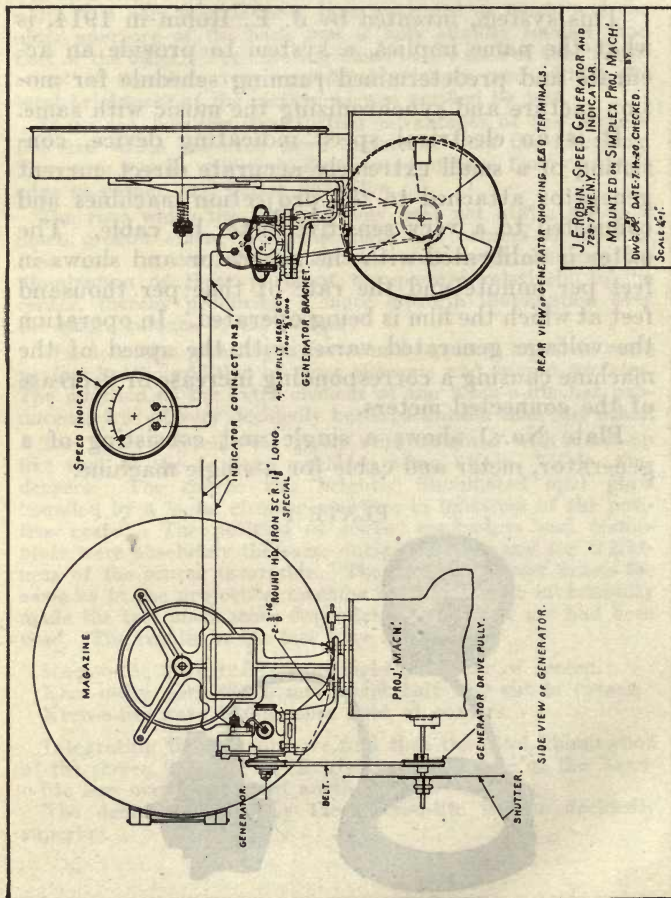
shows a single unit consisting of a generator, meter and cable for a single machine.
